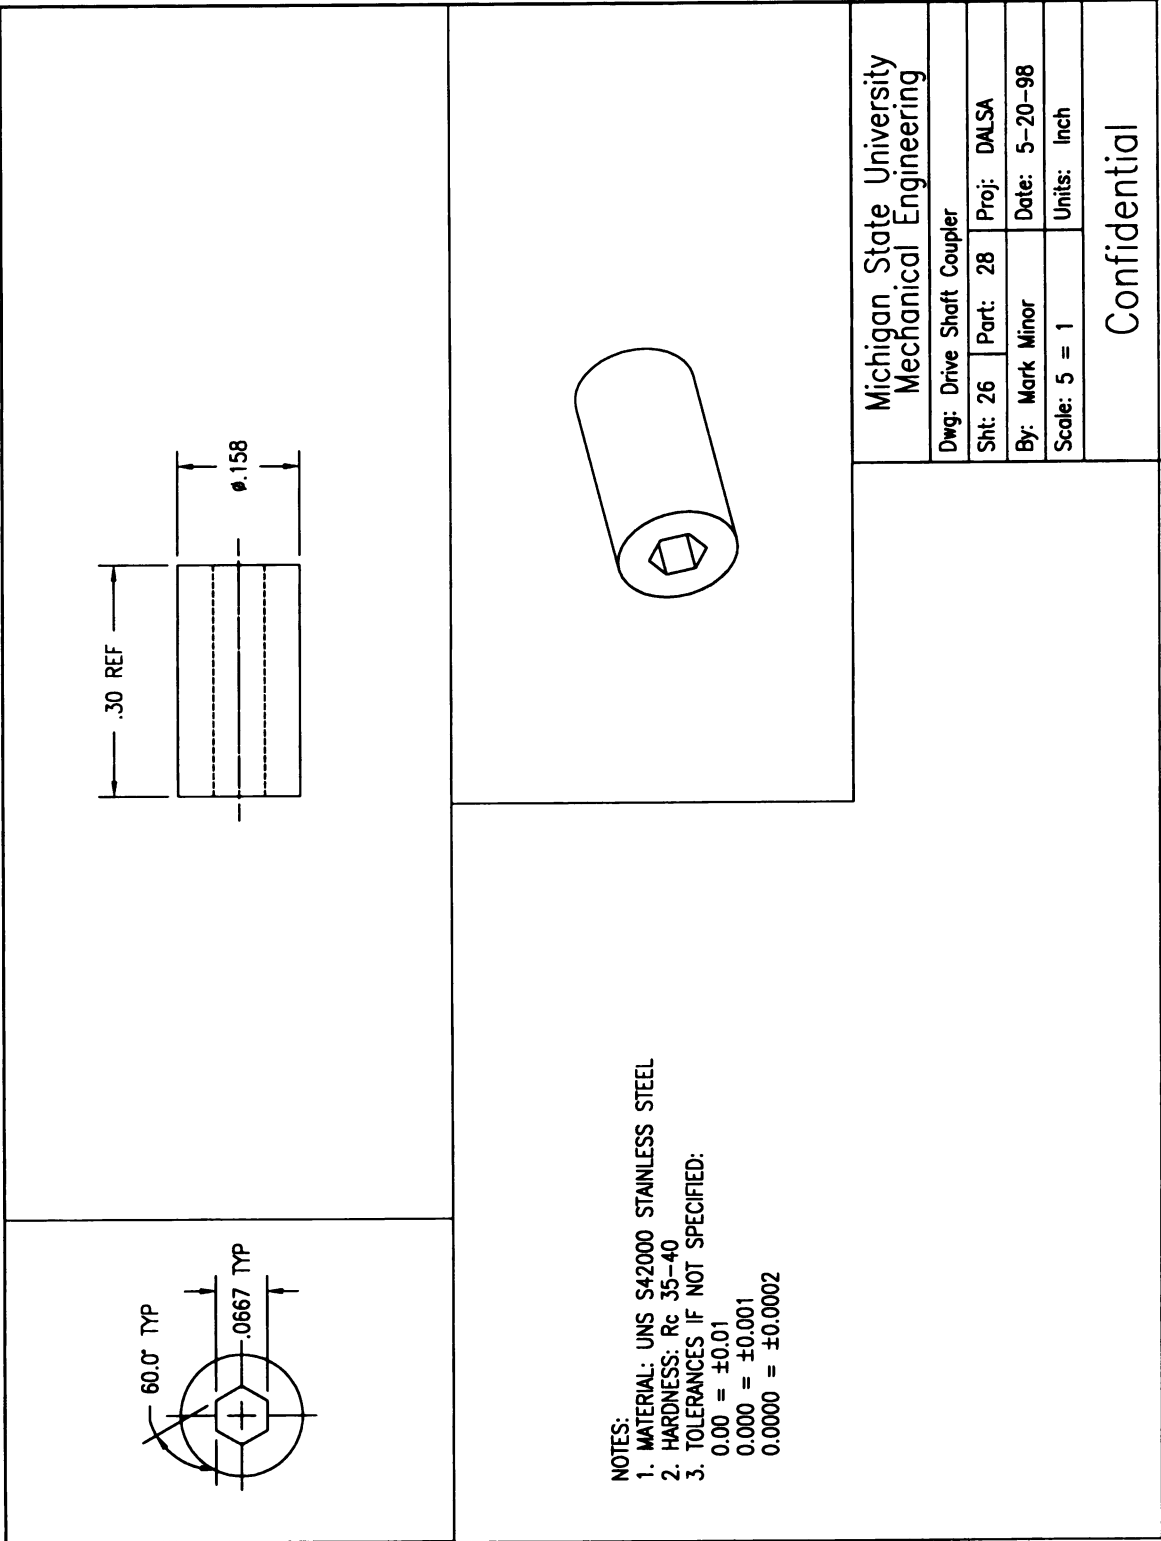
DALSA Component: Drive Shaft Coupler (sheet 26).
